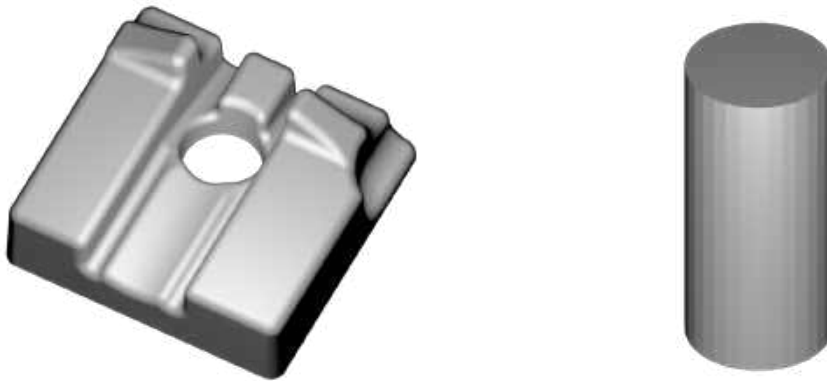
Examples of input shapes: (left) the target part, and (right) a flatend tool of 10 mm diameter.
